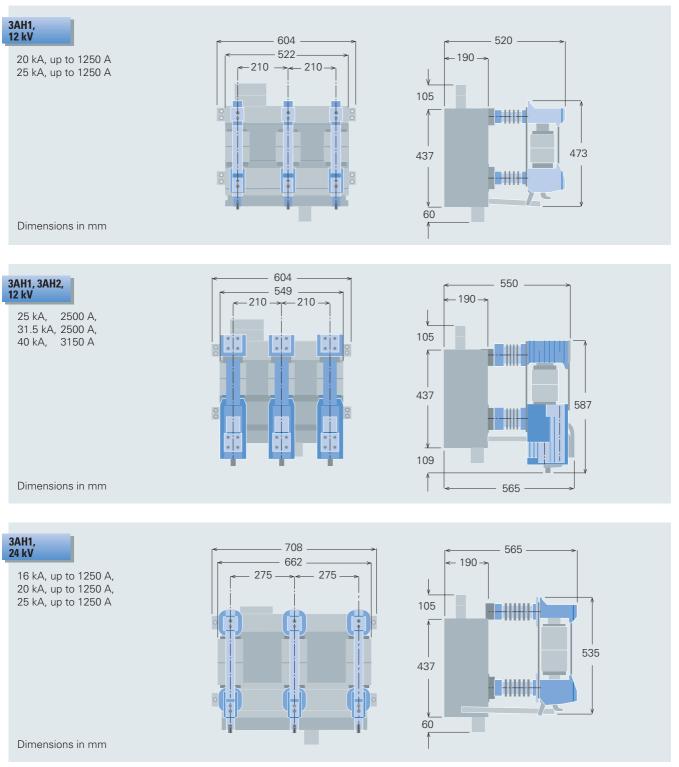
Dimensions of typical vacuum circuit-breakers type 3AH (Examples)
